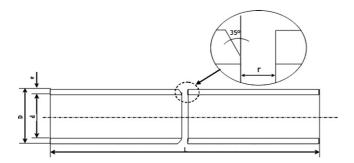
Schematic draw of test bodies and detail of the joint geometry.
